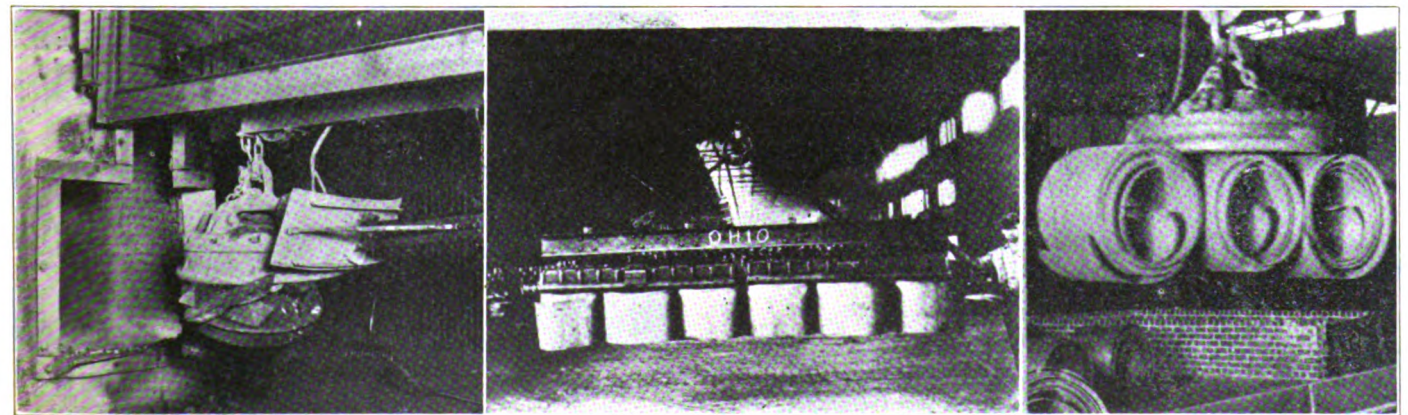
(left)—Shows a magnet supported by a special boom charger serving a continuously operated cupola. FIG. 2 (center)—Shows two 26 in. x 60 in. rectangular magnets supported end to end on a beam for handling coils of hot strip steel. FIG. 3 (right)—Shows a 55-in. diameter round magnet specially prepared for handling a variety of sizes of hot strip coils on their sides.
